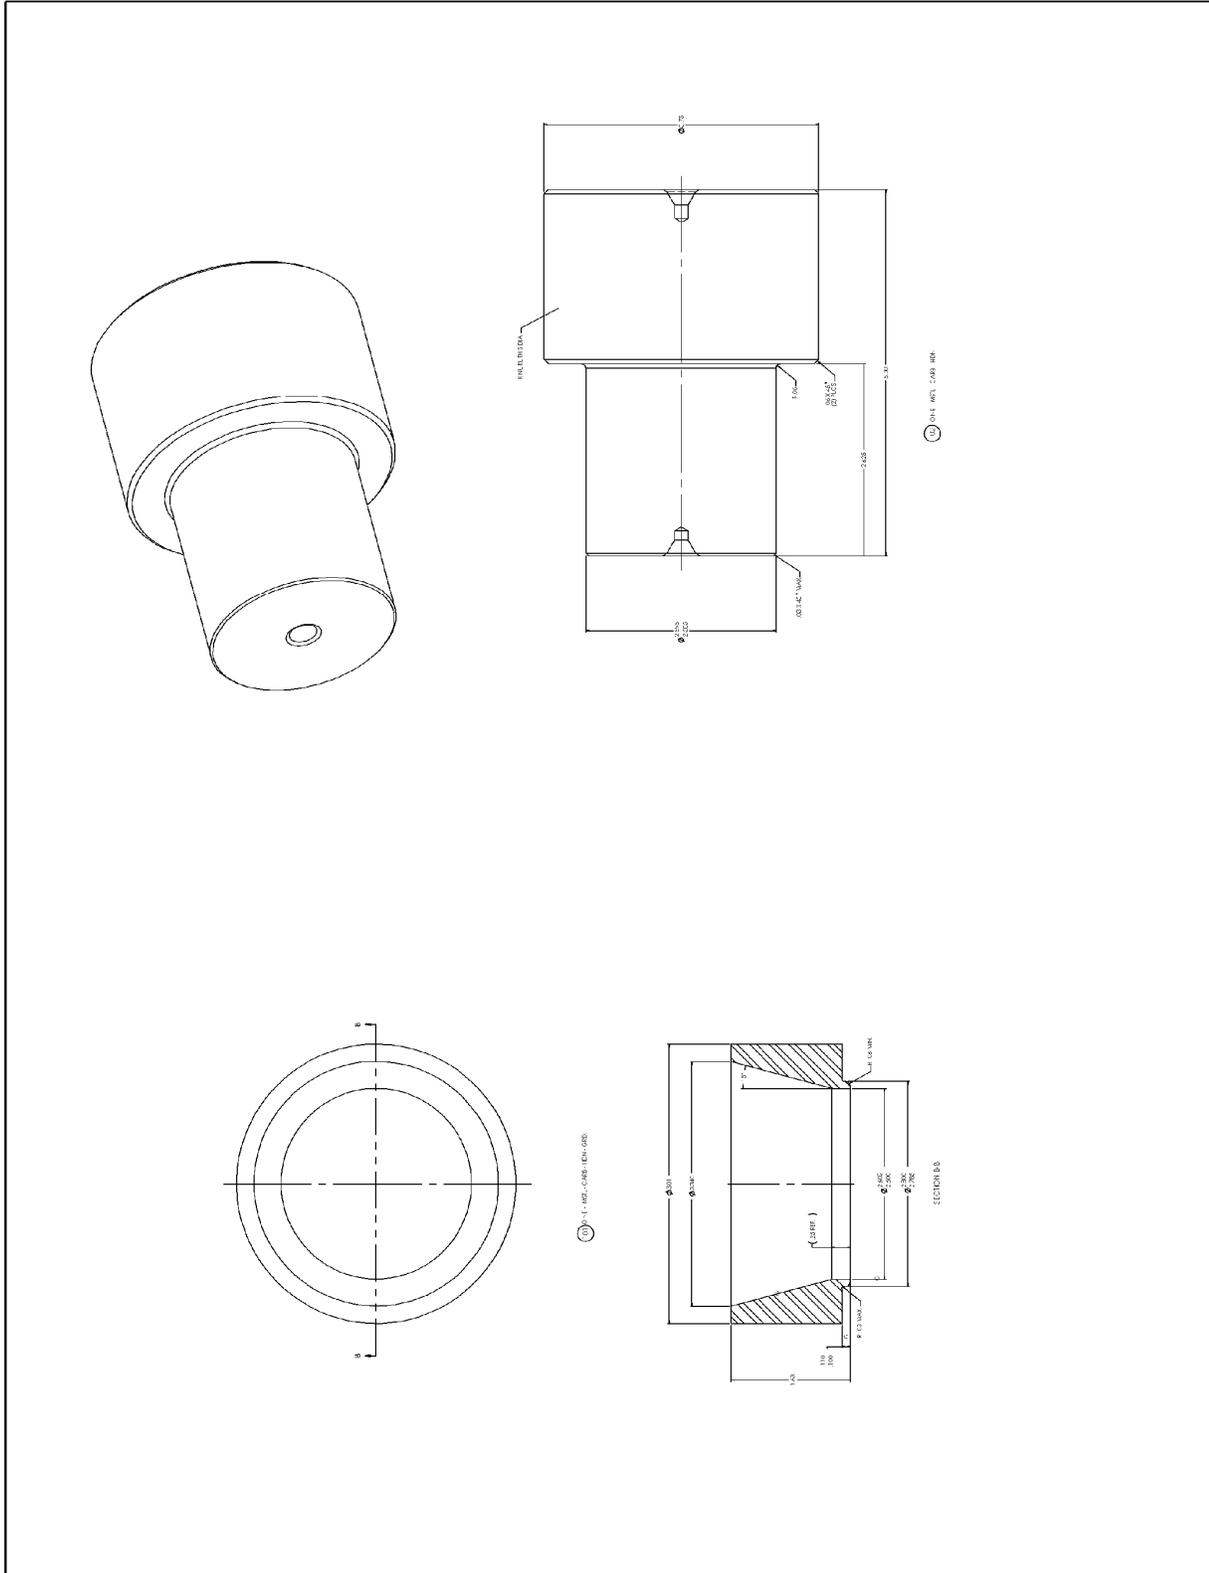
Assembly Tools - Brake Retaining Ring Installation
